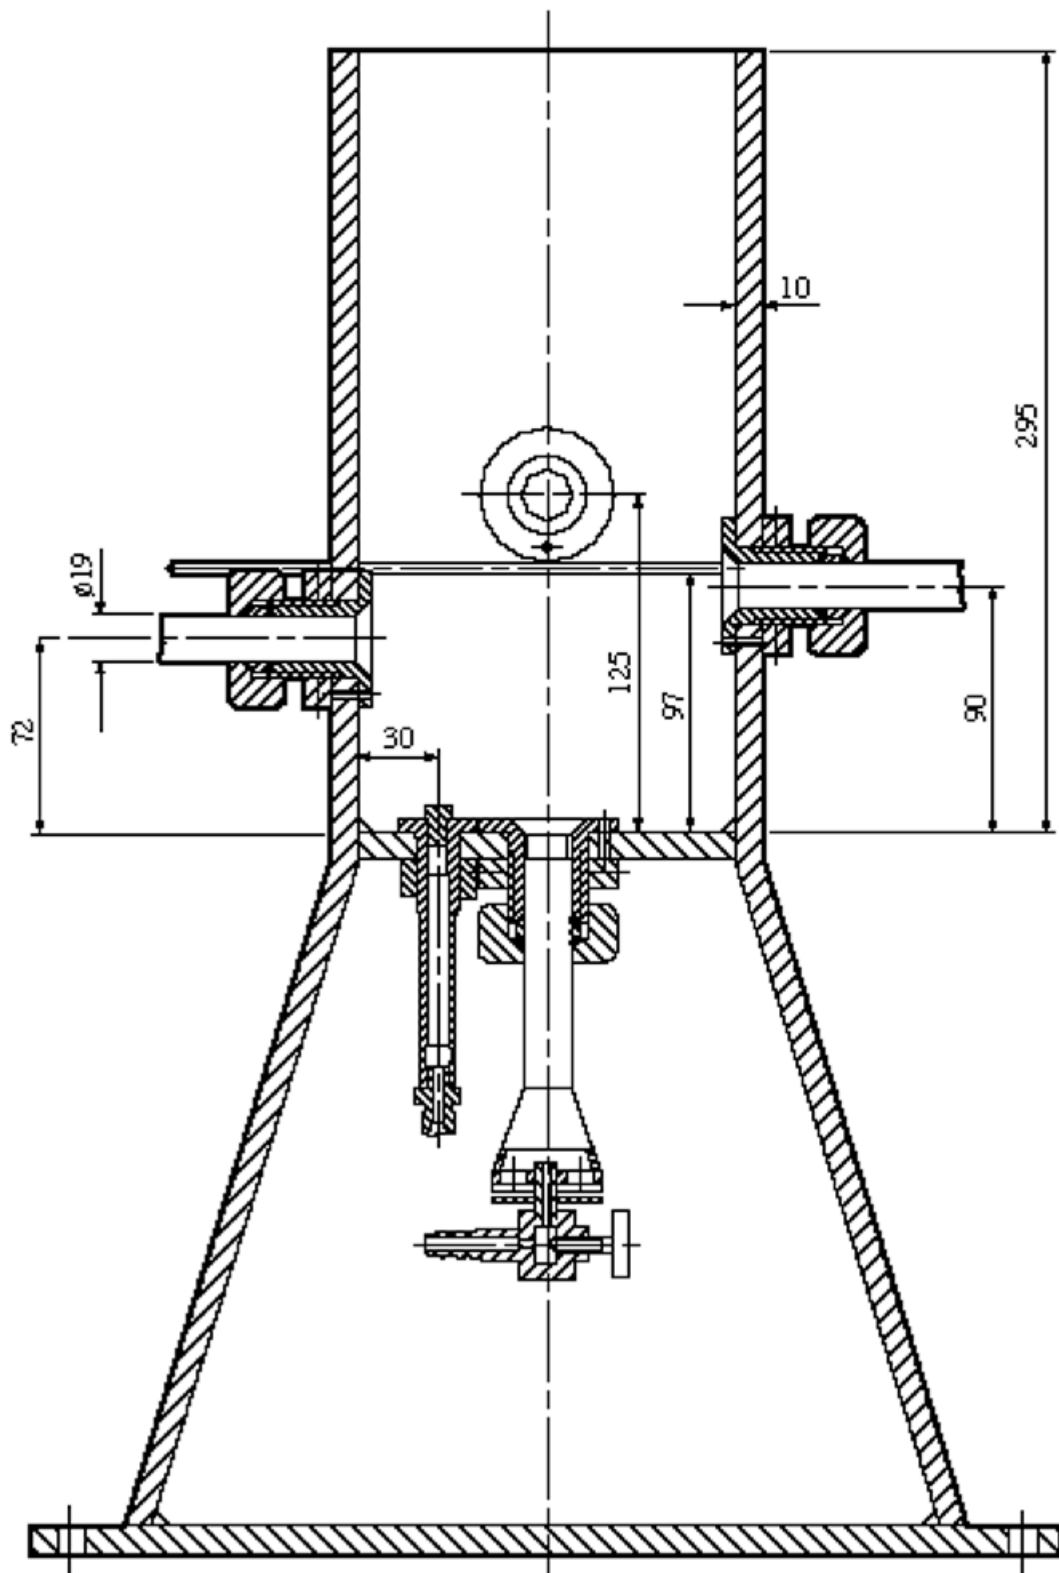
HEATING AND PROTECTIVE DEVICE
